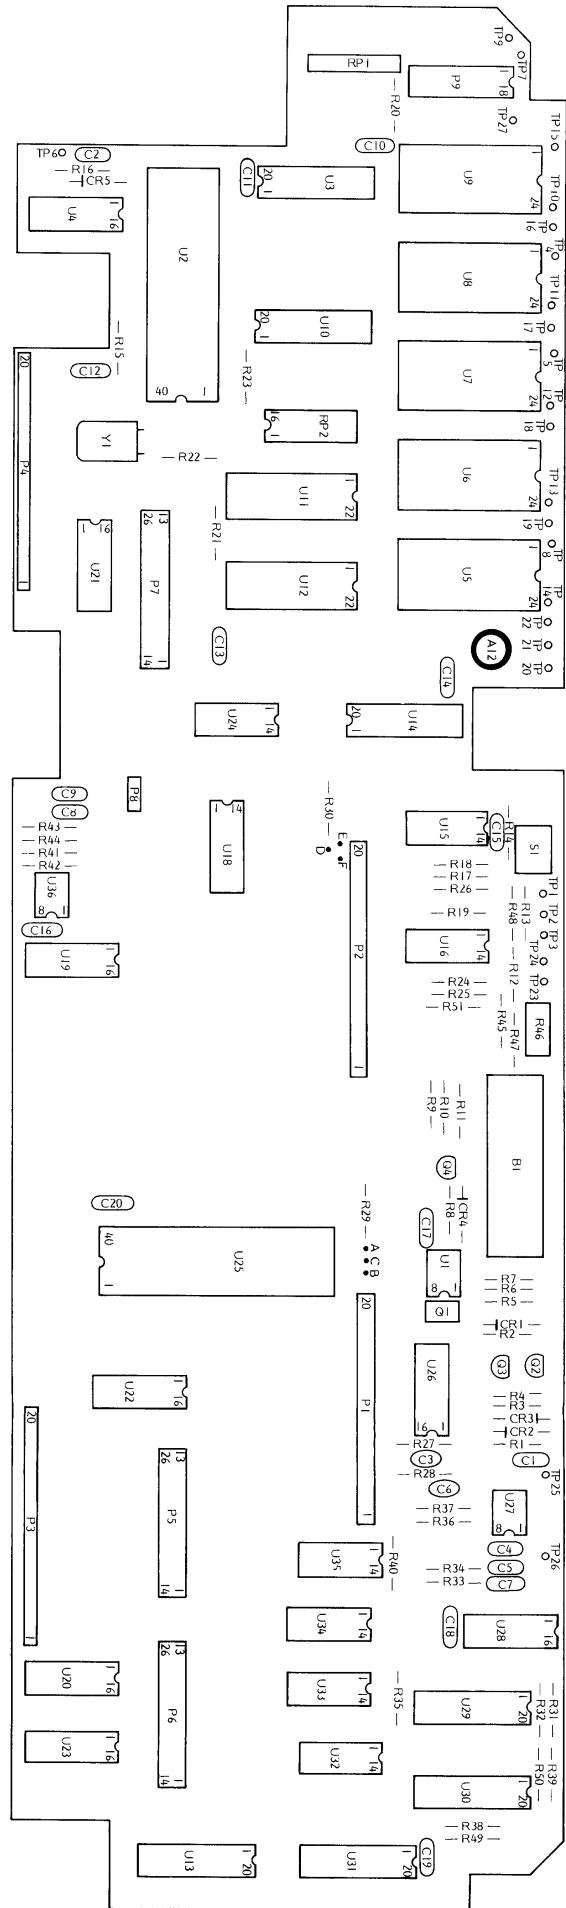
A12 Microprocessor PCB Parts Locator Diagram
